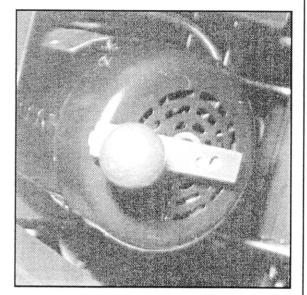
This photo shows motor crank installed into motor housing. Turn Clockwise Only. Remember to remove crank before turning power on. Failure to remove crank will produce strong vibration of the machine causing severe damage.
